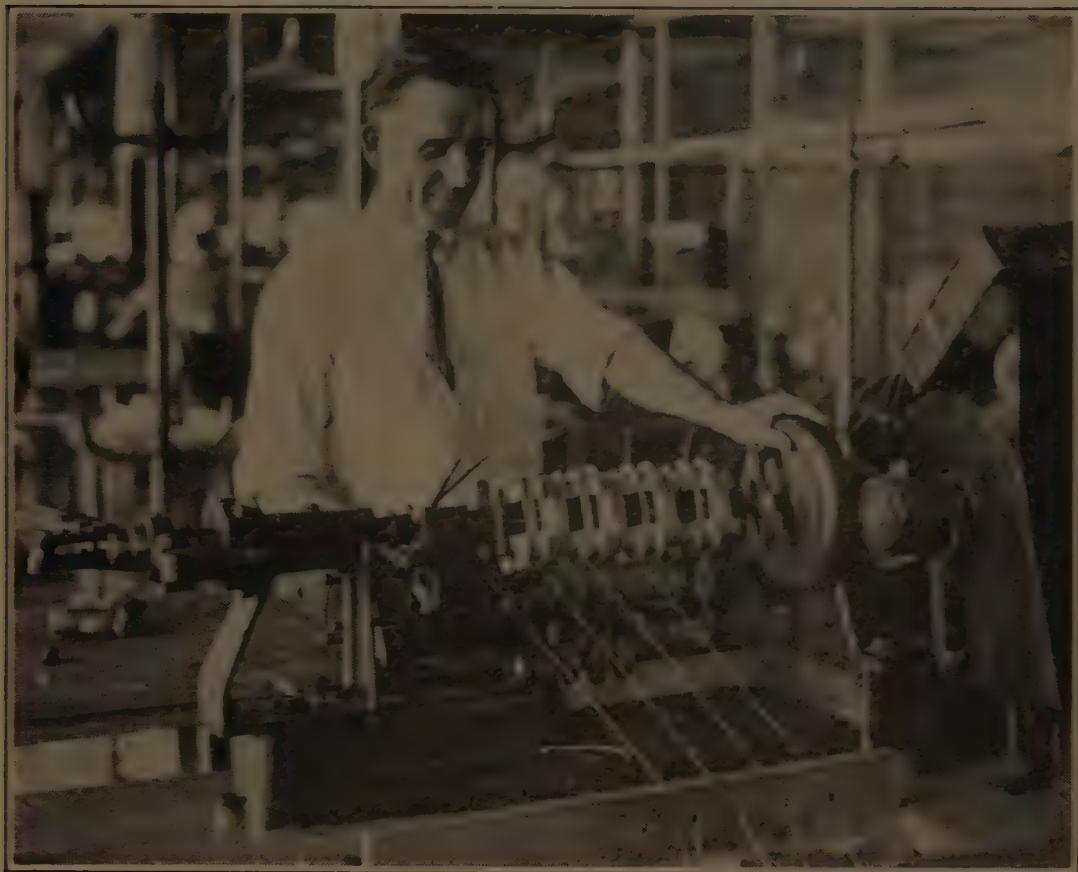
FIG. N.—Method of winding four mould-wound sets of coils simultaneously for a four-pole motor.
